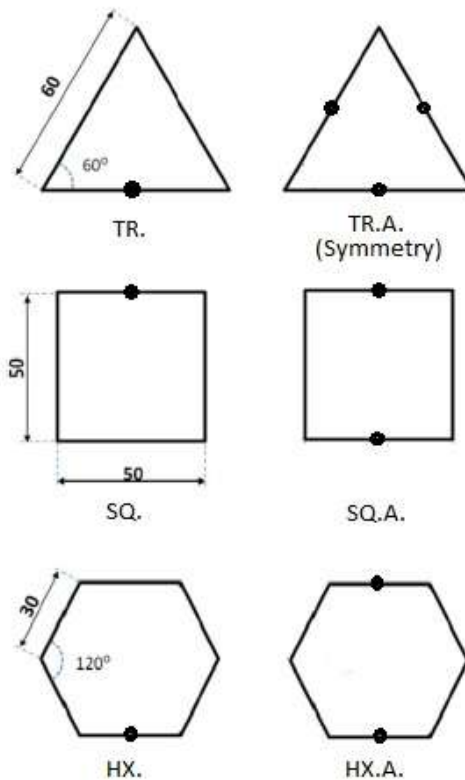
Sections geometry and dimensions of specimens (all dimensions in millimeter)
